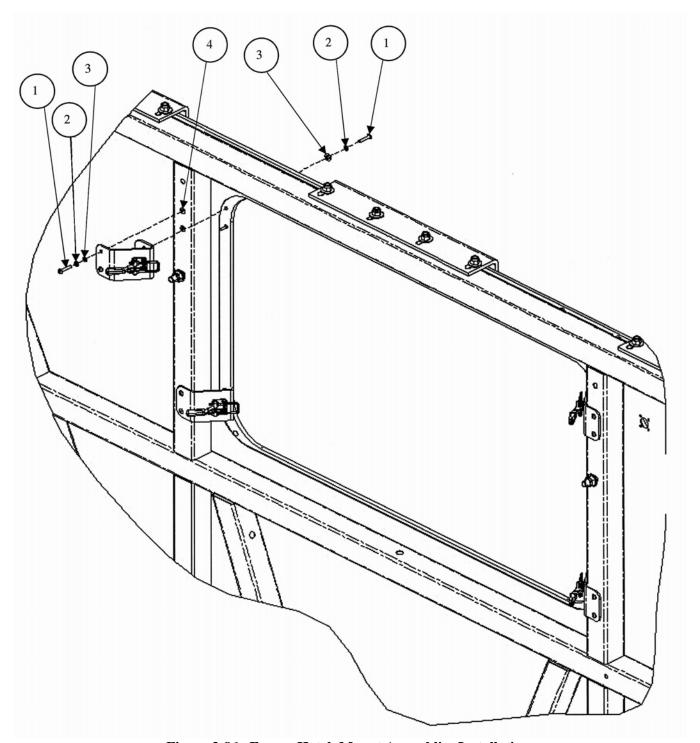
Escape Hatch Mount Assemblies Installation.
